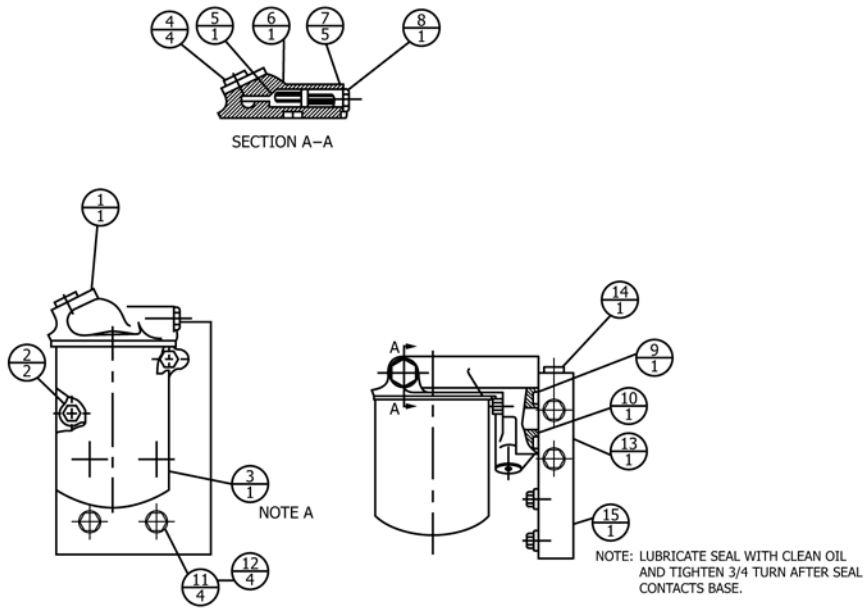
Oil Pump Accessory Drive Housing Drain
